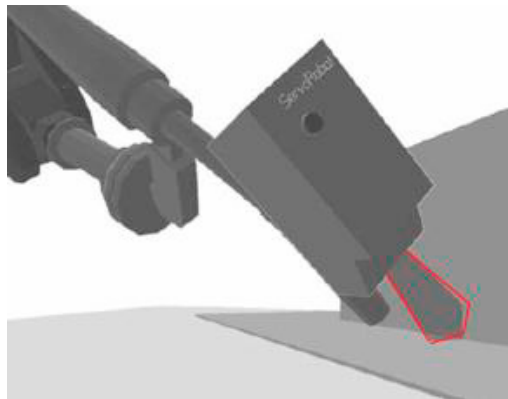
3D model representation in the CAR system of a welding torch with attached seam tracker [24].
